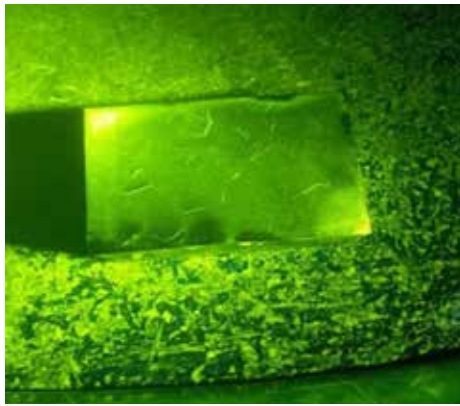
The image of the sample taken from defects area of the casting part. The sample sent to FOSECO Netherlands R&D Center was cut with a saw and the crack depth in the sample was visually inspection. The original crack depth of the sample is shown in Figure 7.
